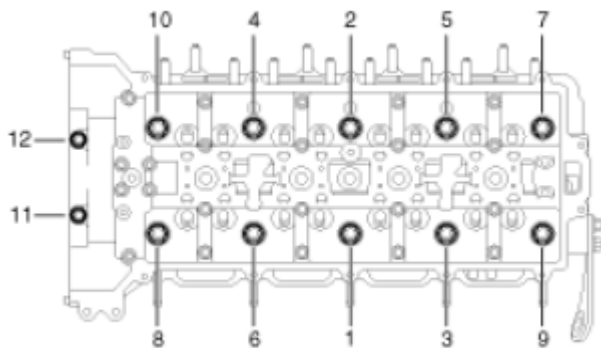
Identifying Cylinder Head Bolts Tightening Sequence (RH)
